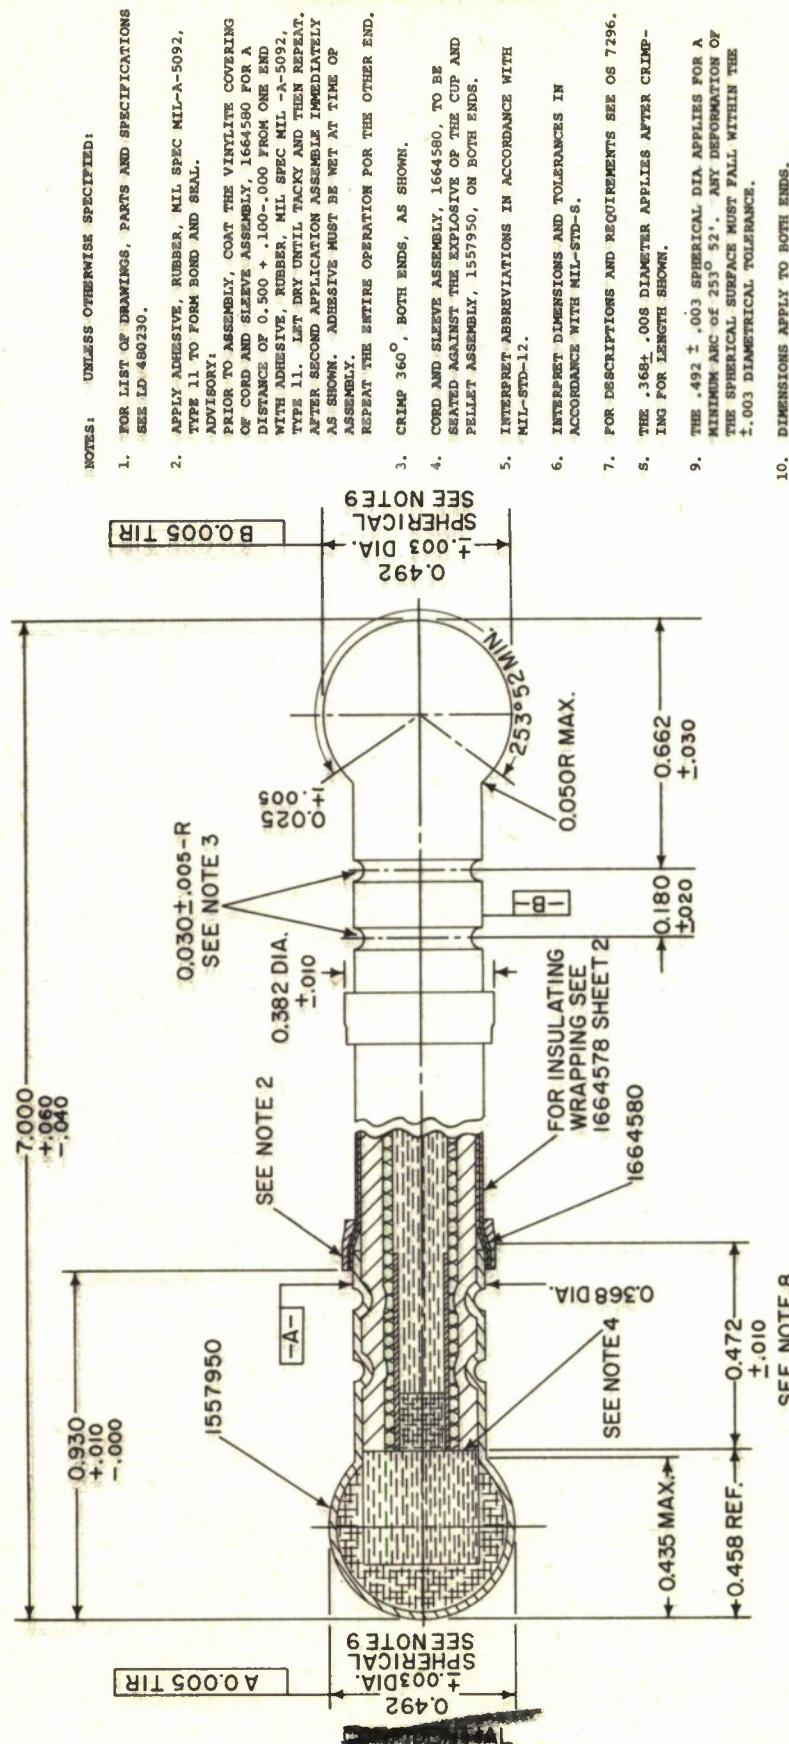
LEAD, EXPLOSIVE, FLEXIBLE MK II MOD O ASSEMBLY
